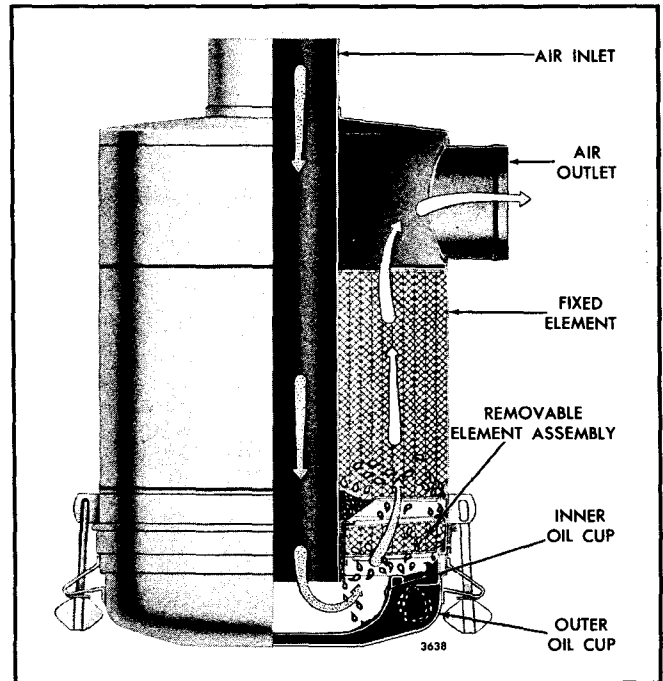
Heavy-Duty Oil Bath Air Cleaner
